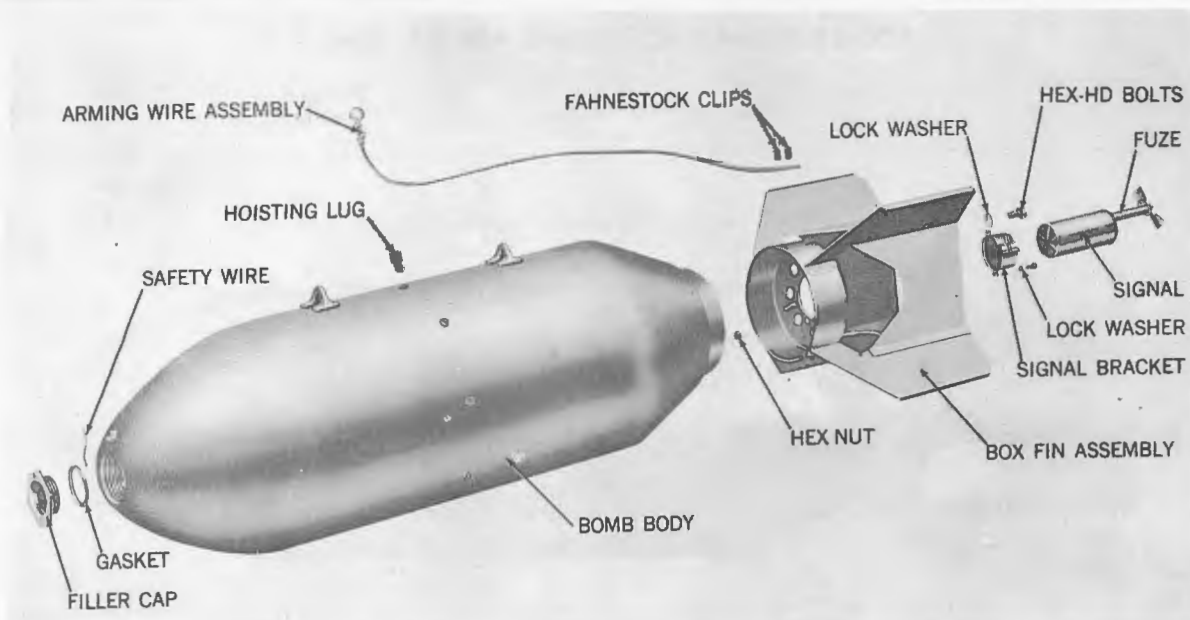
500-lb Practice Bomb Mk 65 Mod 0, Exploded View.
